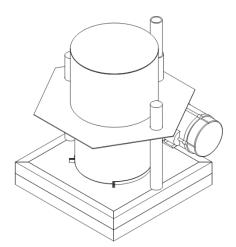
Isometric view of the Instant Amala making machine (SOLIDWORKS)
